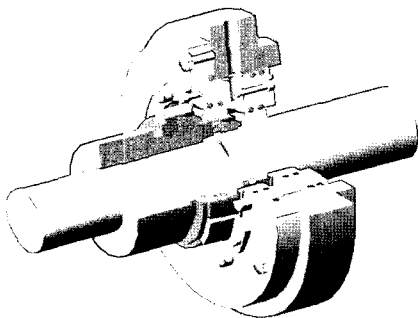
Double sealing units with mechanical face seals for a hydro-power turbine.
